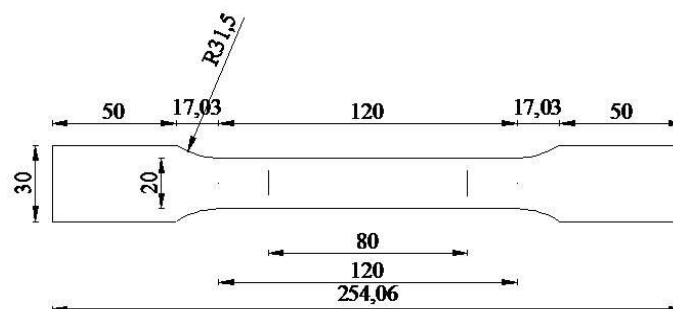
Tensile specimen DIN 50125- H 20 × 80
